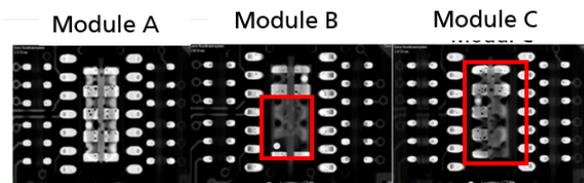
CT scan of the solder layer for different modules on the same test board (Source: HELLA GmbH & Co. KGaA)
